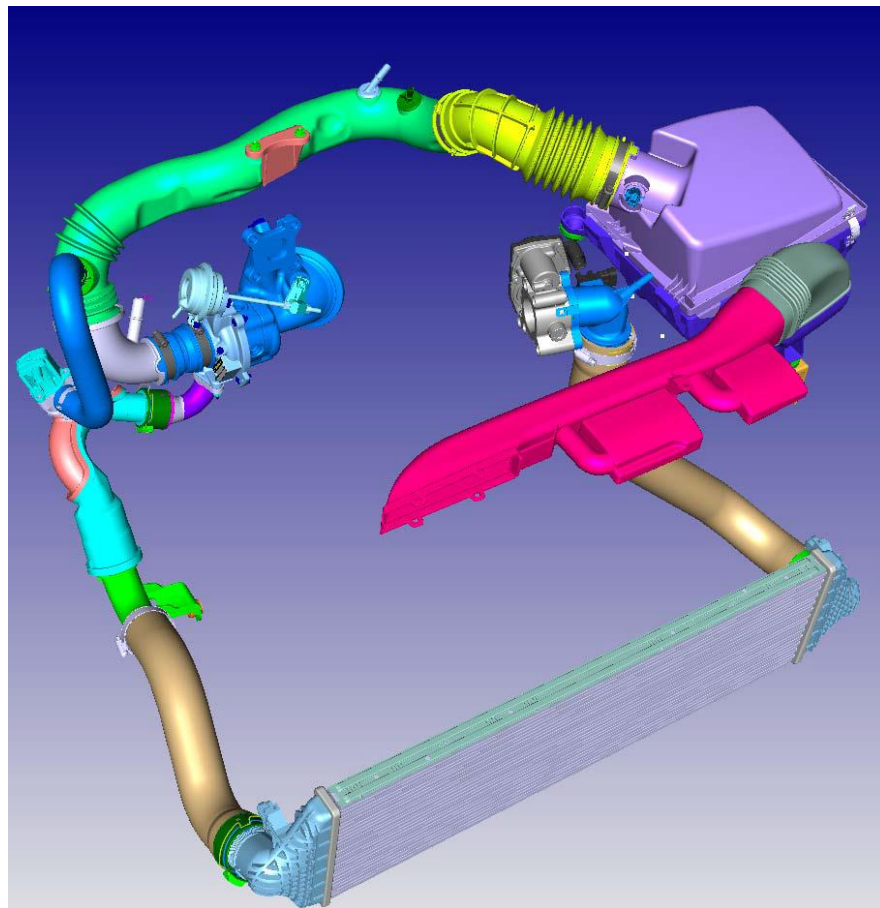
Fox Upgrade intake system CAD drawing (courtesy of Ford Motor Co)
